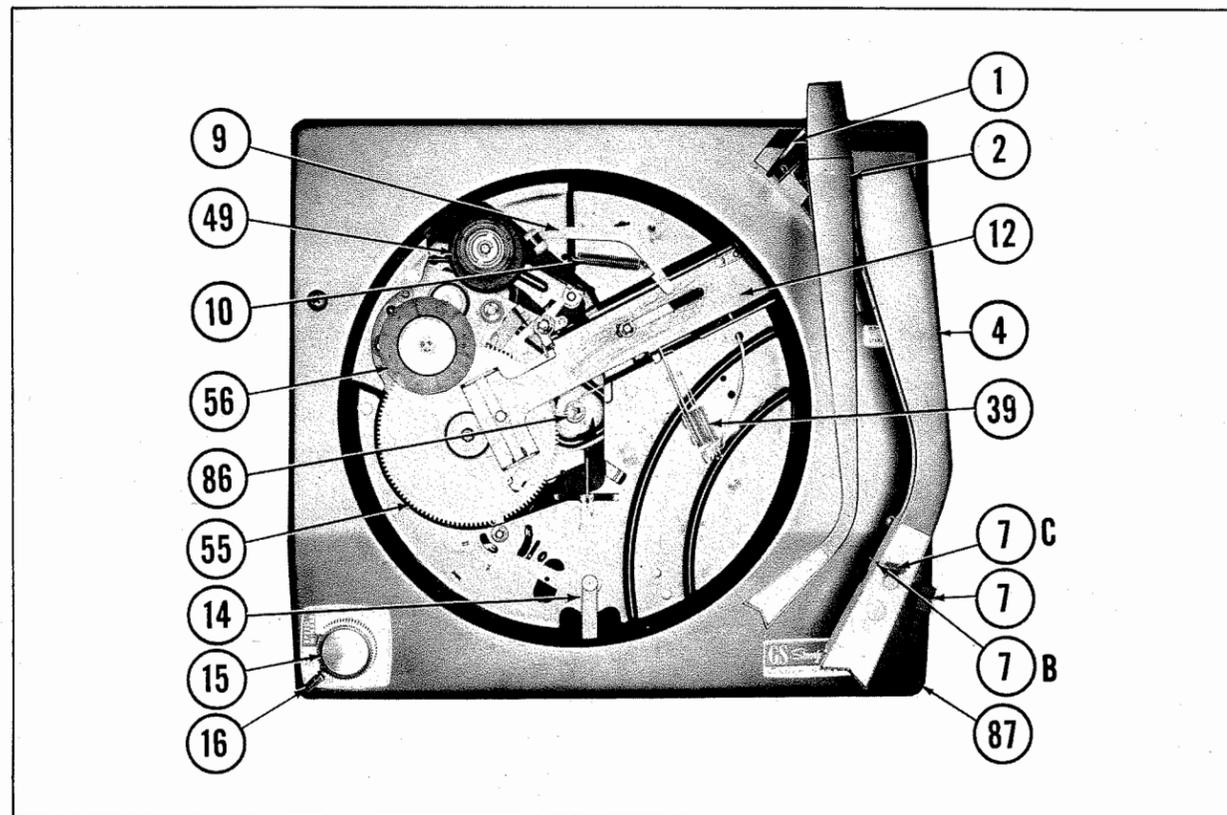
TOP VIEW OF MECHANISM WITH TURNTABLE REMOVED
